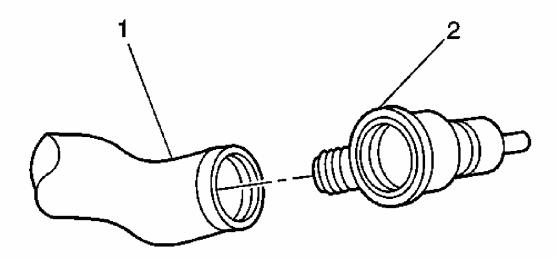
View Of Vacuum Brake Booster Check Valve And Vacuum Brake Booster Hose
